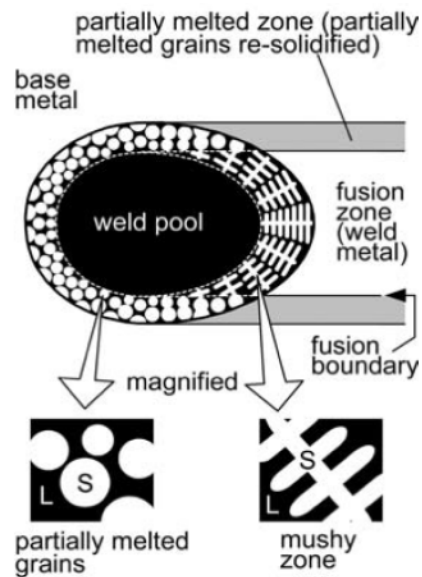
Semisolid materials around weld pool of alloy during welding<sup>[12]</sup>
